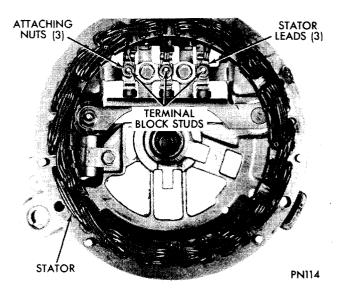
Rectifier End Shield and Stator Assembly Rectifier and Heat Sink Assembly Removal (Fig. 19)
